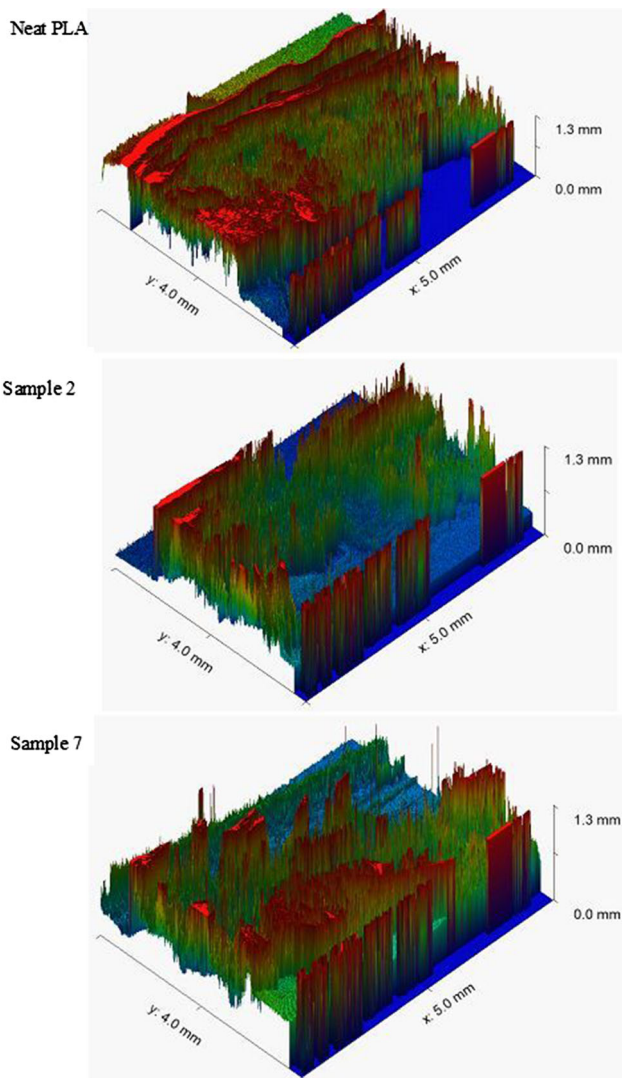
Rendering of fractured surfaces of welded joints
